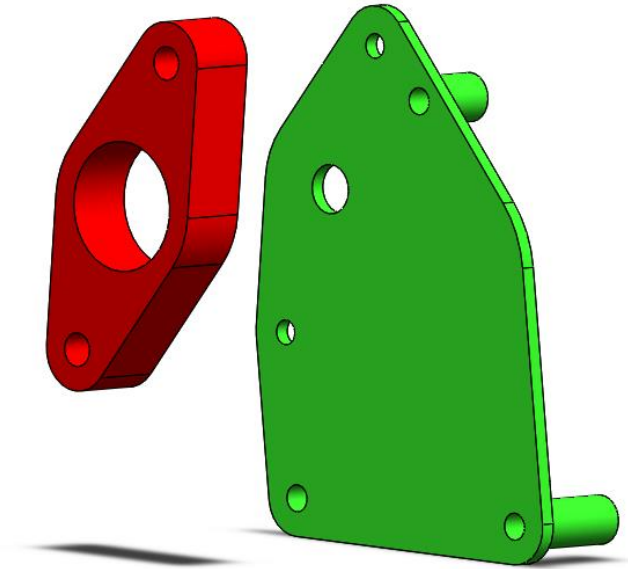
Proposed Alternative Manufacturing Method for the Original Starter Bracket
